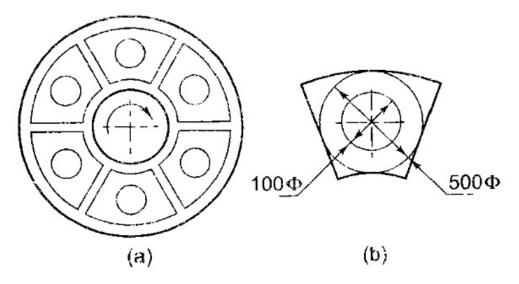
(a) Six pad Bearing (b) Dimensions of Pad
